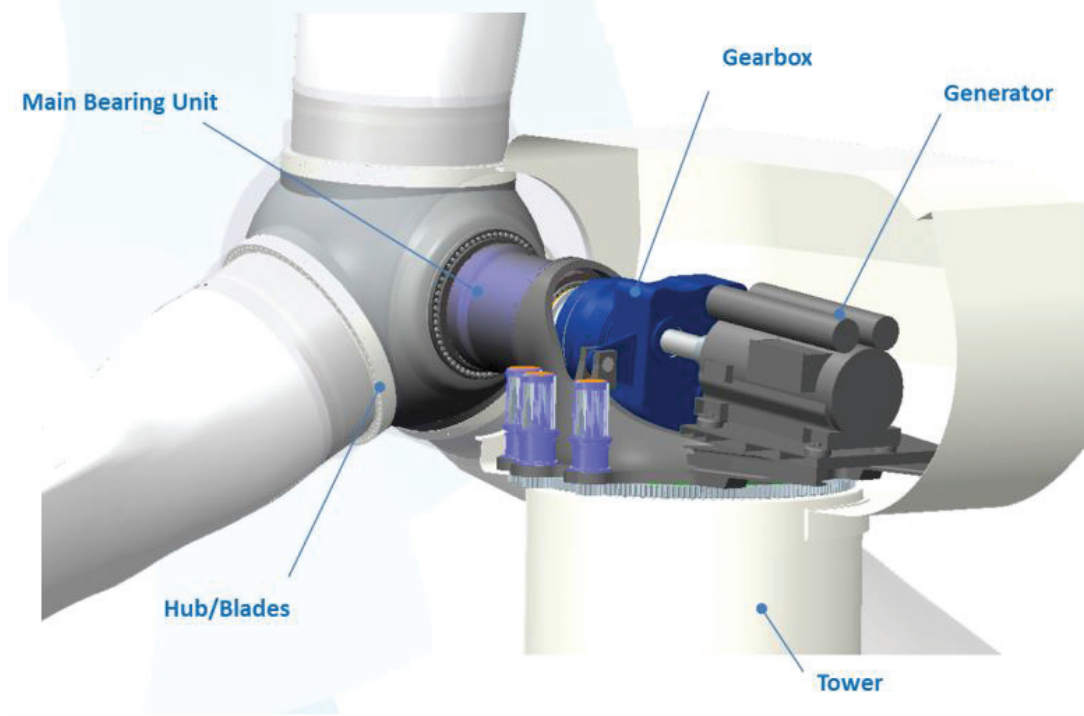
The main bearing unit in a wind turbine. Courtesy : EOLOTEC
